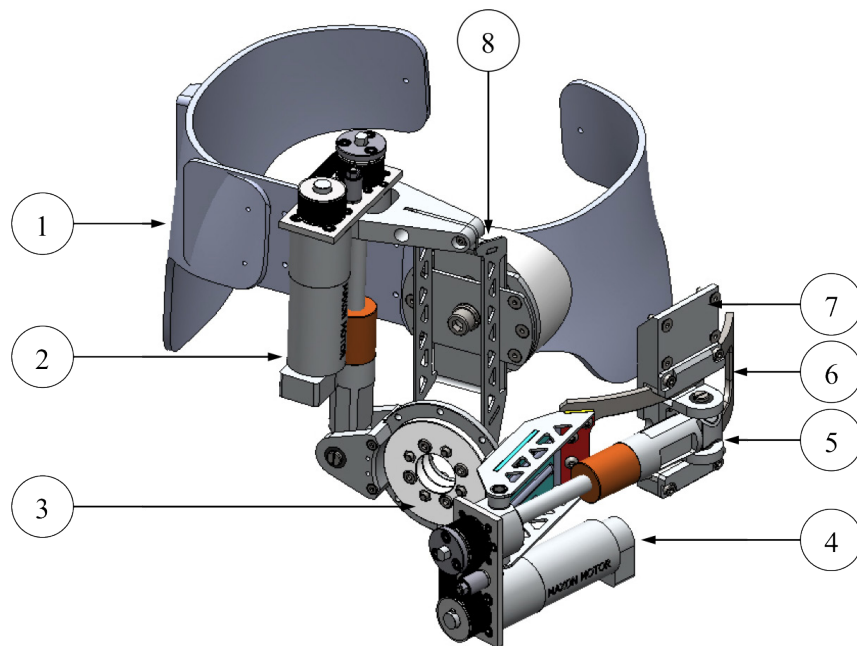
Serial mechanism of ACHM module. 1: hip belt; 2 and 4: equal actuation systems for the abduction/adduction and intra/extrarotation DOFs composed by a Maxon gearmotor of 150W and a spindle drive coupled through a timing belt mechanism; 3: IGUS slewing ring bearing; 5: shaft integrating strain gauges for force measurement; 6: sliding flange for intra/extra rotation; 7: interface with hip/knee flexion/extension module; 8: connection to the hip belt with to the possibility to adapt the module to different anthropometric sizes.
